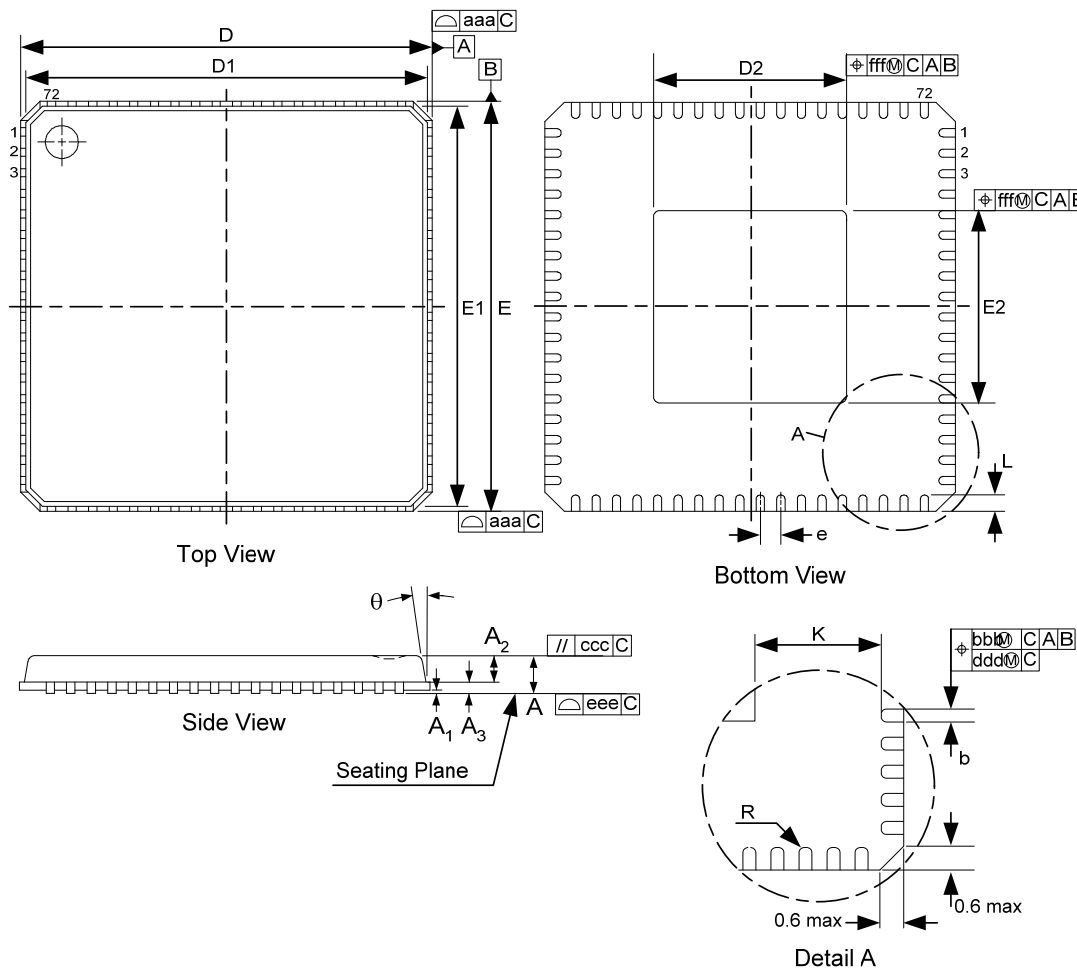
72-pin QFN Package Diagram (SiI902nACNU)
